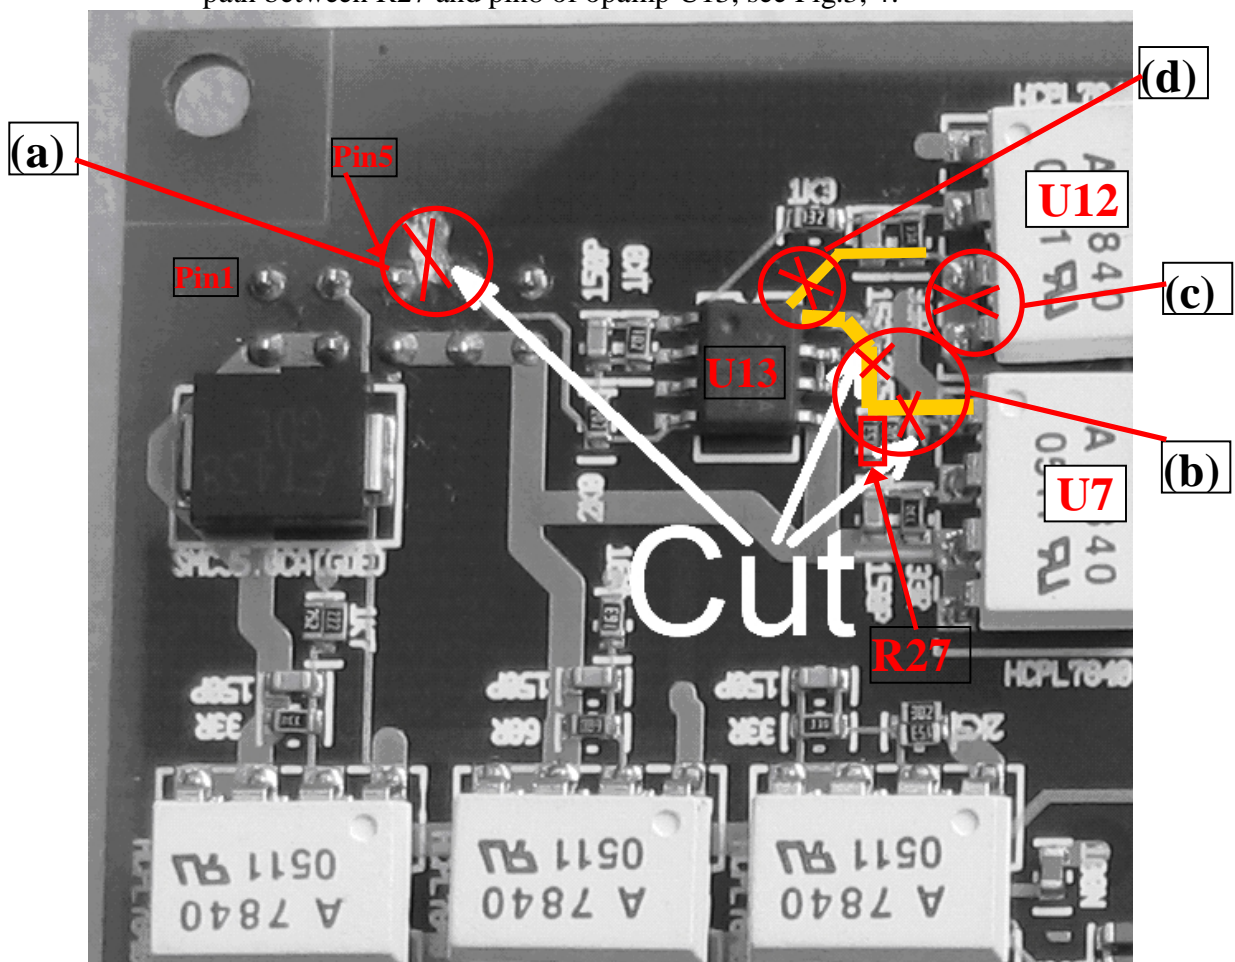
Bottom side photos of ELMB_MBv6.5. Cutting traces on bottom side.
